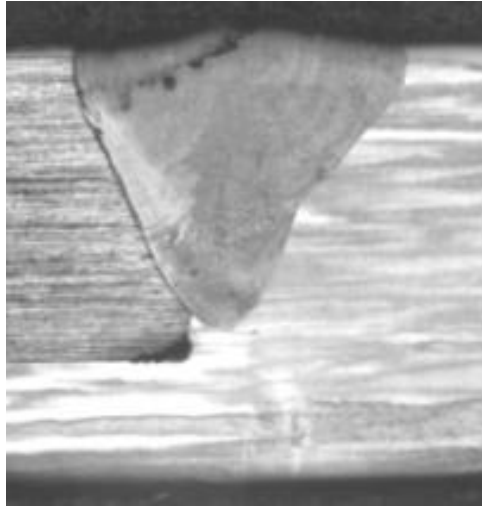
Micro structure of weld with weld speed 1200 rpm
